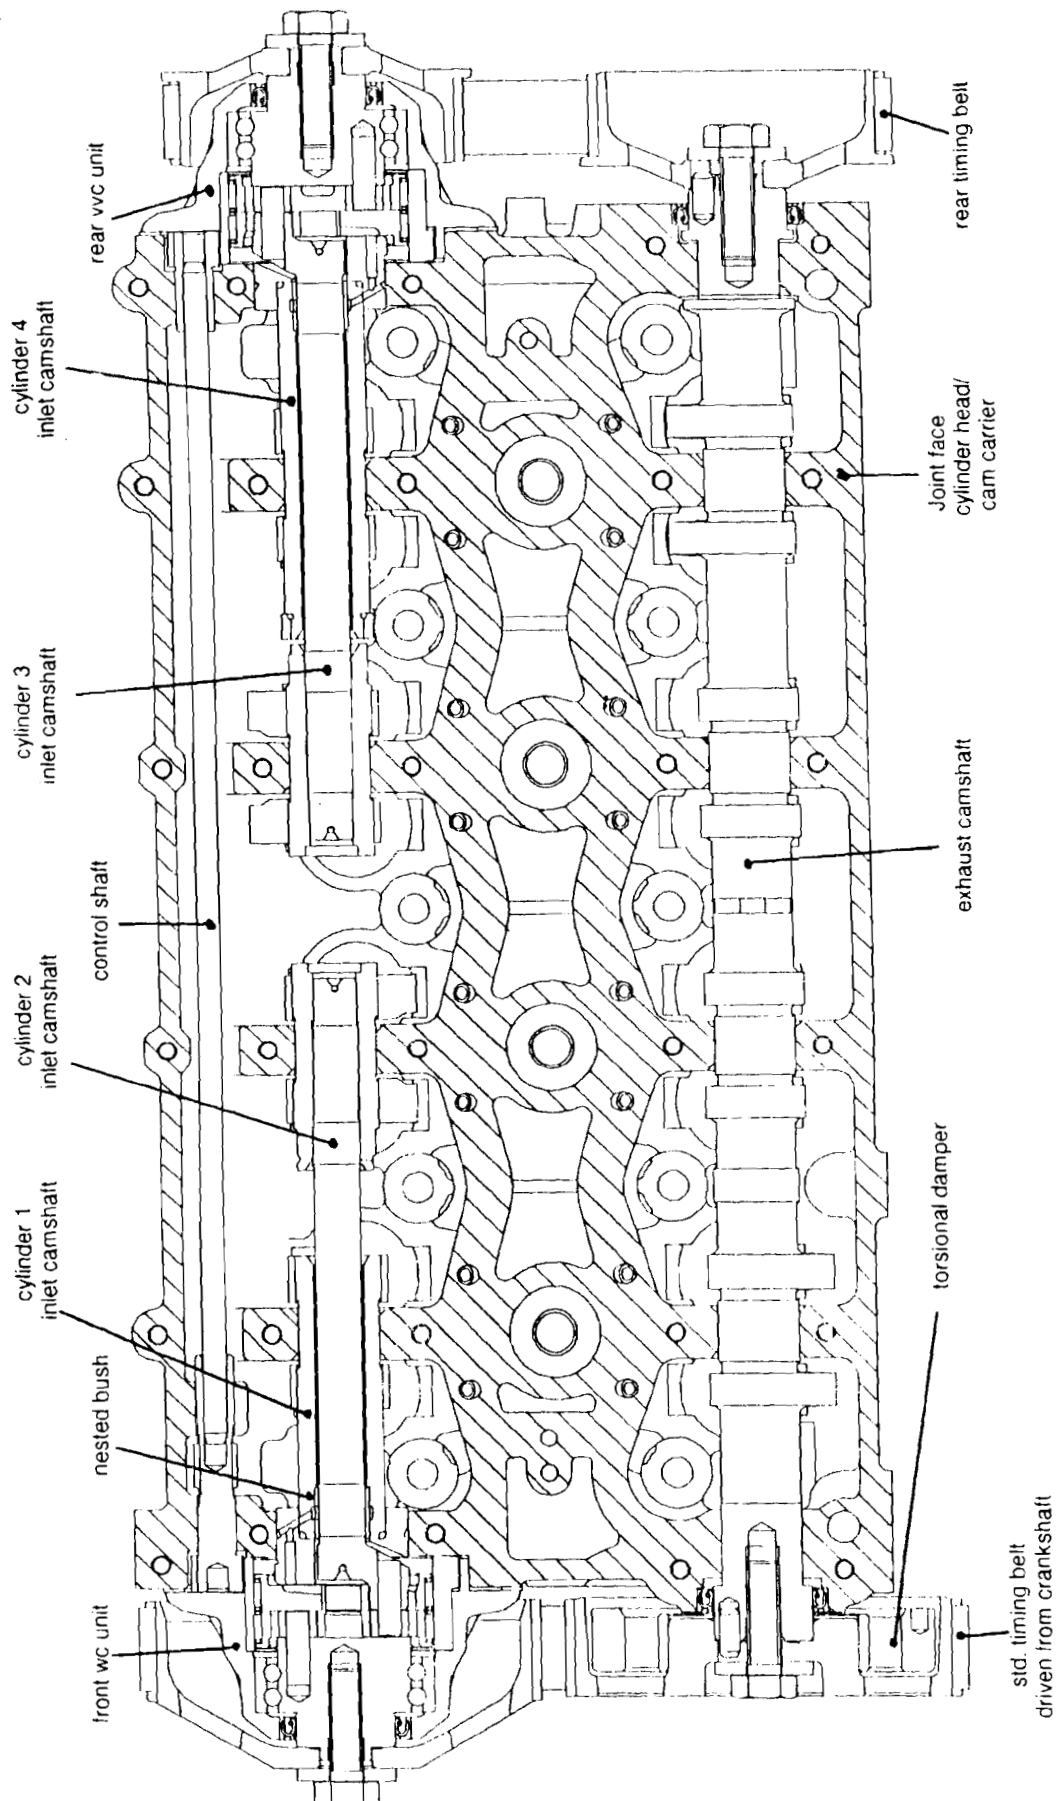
Mechanical arrangement of the VVC cylinder head: plan view with the cam carrier removed
